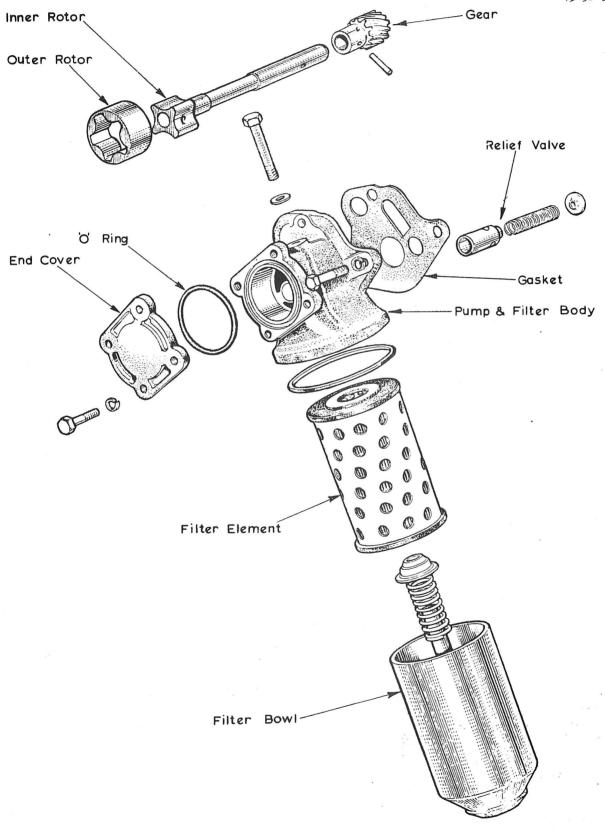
LUBRICATING OIL PUMP & FILTER COMPONENTS
